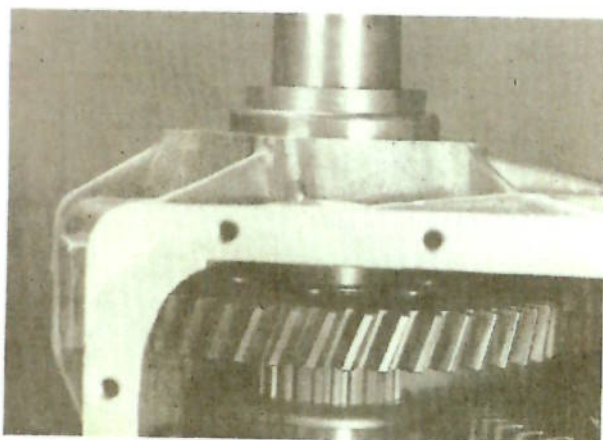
INSTALLING THE CUP OF REAR TAPERED ROLLER BEARING IN THE TRANSFER CASE.
